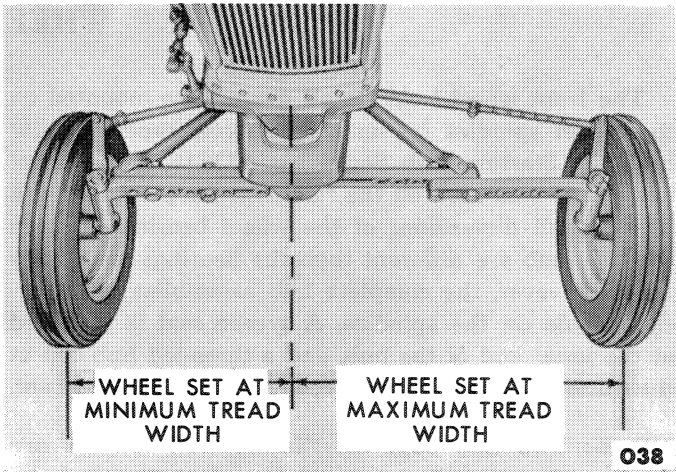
Front Wheel Tread Adjustments—Row Crop Tractors
